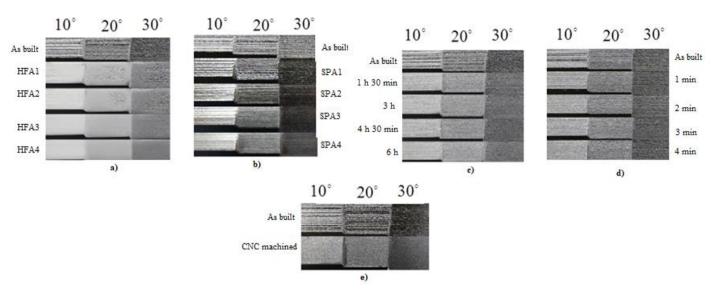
Improvement of surface finish through hand finishing (a), spray painting (b), tumbling (c), shot peening (d) and CNC machining of Alumide® test pieces
